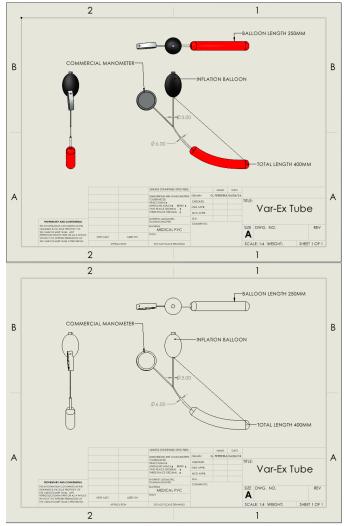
The rescue device assembly drawing. This drawing shows the critical dimensions of the full device. The scale of the drawing is 1:8 and contains the critical drawing views as well as the isometric view. All of the dimensions of the device are listed in mm, with the associated +/- 0.1 mm tolerances. This is drawing 1:1 for the complete device assembly and is on drawing size A.
